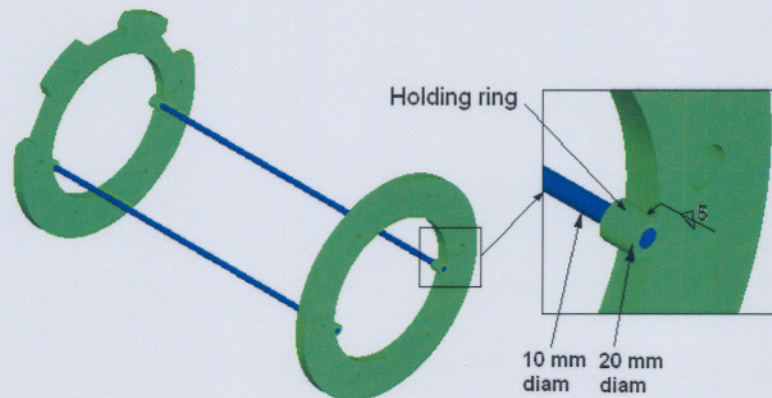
Heater platform holding ring (Appendix 7: drawing group INST_HEA_PLAT)
